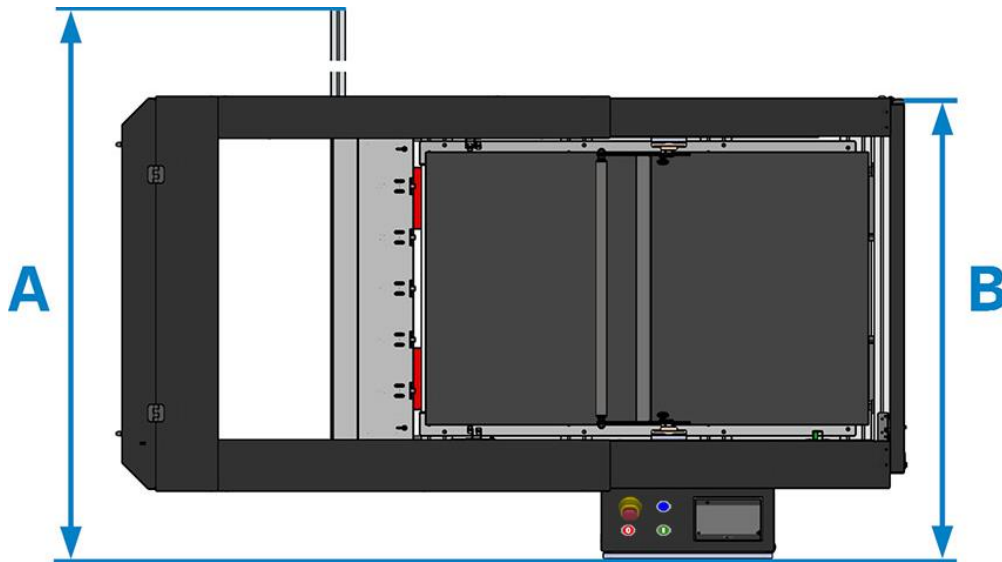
MACHINE DIMENSIONS TOP VIEW
